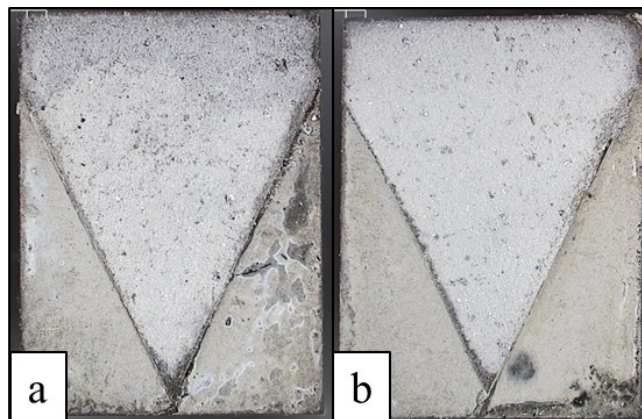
Front view of fractures in the first (a) and second (b) 1000°C fracture toughness specimens.
